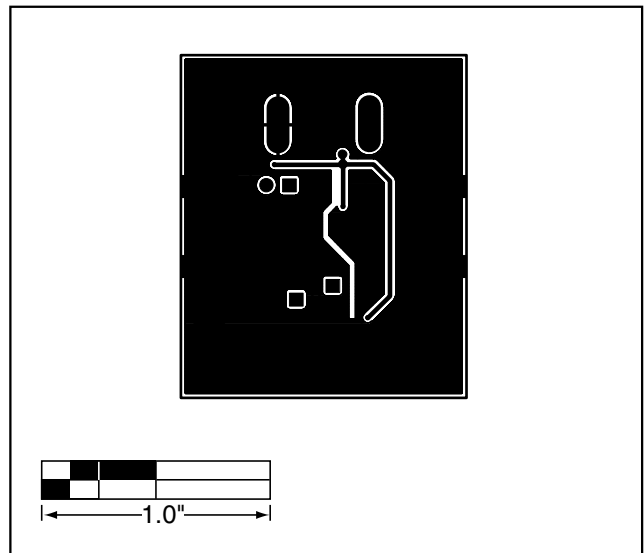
MAX2841 EV Kit PC Board Layout—Secondary Side
